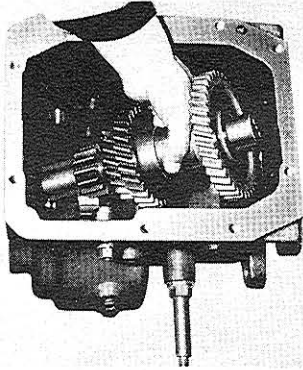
Removing Counter V5071 Shaft Assembly
